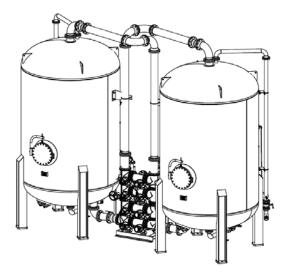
Example GAC Vessel Isometric View (Source: Calgon Carbon)
